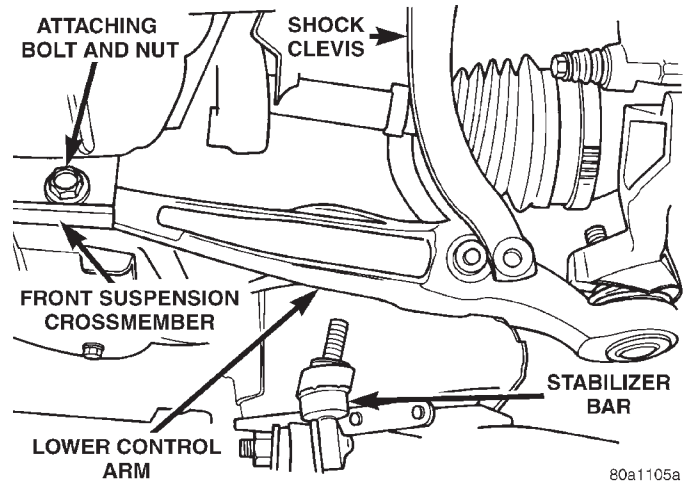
Attaching Front Of Lower Control Arm To Suspension Crossmember
